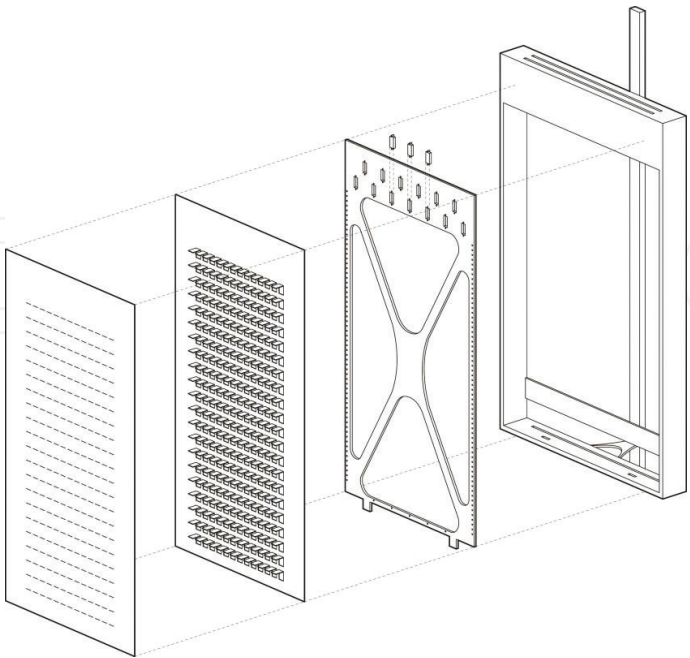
Exploded axonometric of FELT Plexiglas frame, aluminium frame and textile sheets 1 and 2 of the felt textile panel.
